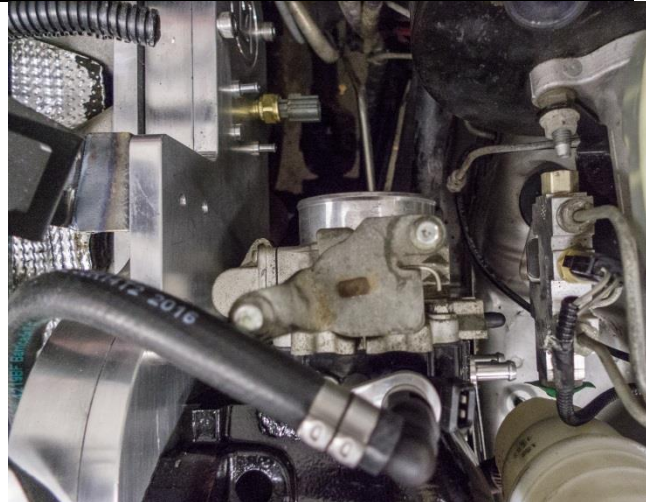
Stock throttle body properly installed. Ignore fuel line in lower part of image.
